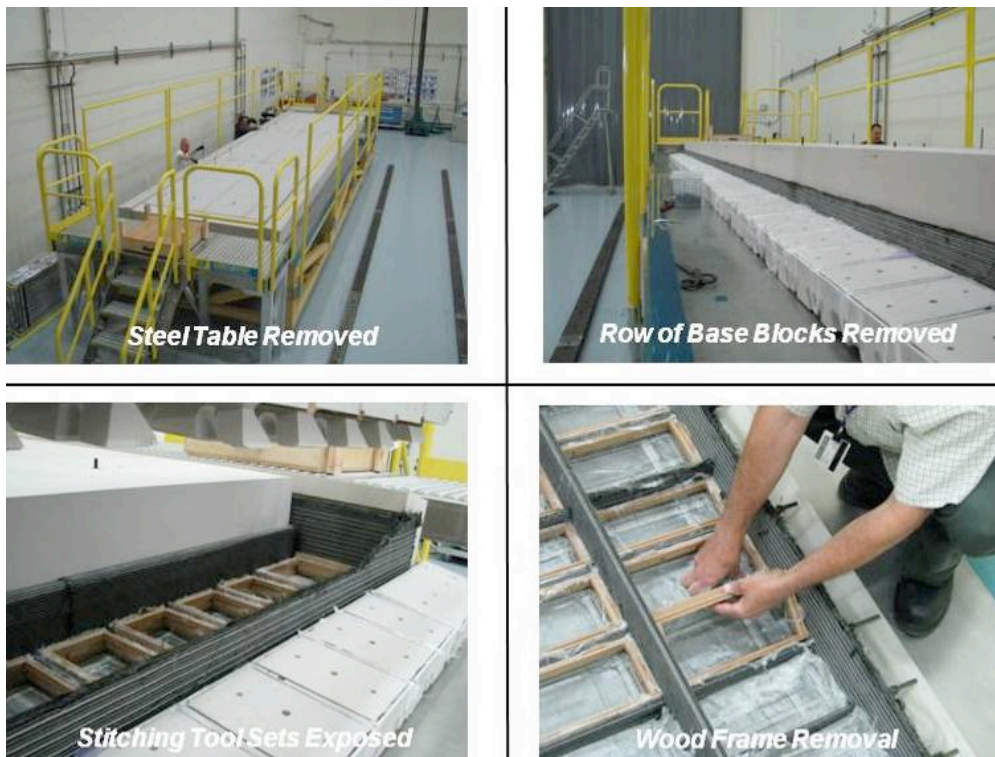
Removal of Stitch Tool Foam Blocks and Wood Frame Tooling Details
